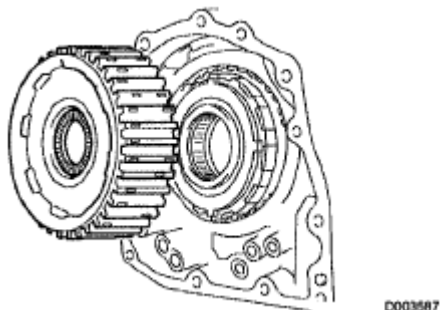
Installing Rear Planetary Sun Gear Assembly To Rear Planetary Gear
